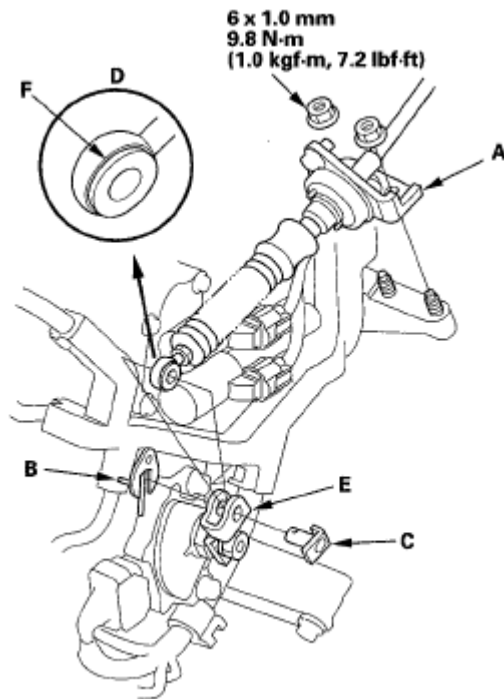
Identifying Shift Cable Bracket, Spring Clip/Washer, Control Pin, Bushing And Control Lever With Torque Specificaiton
